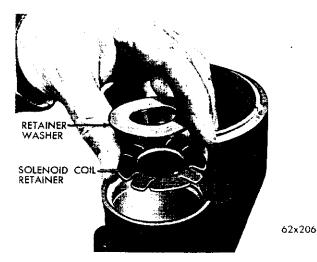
Identification of the Solenoid Coil Retainer and the Retainer Washer
